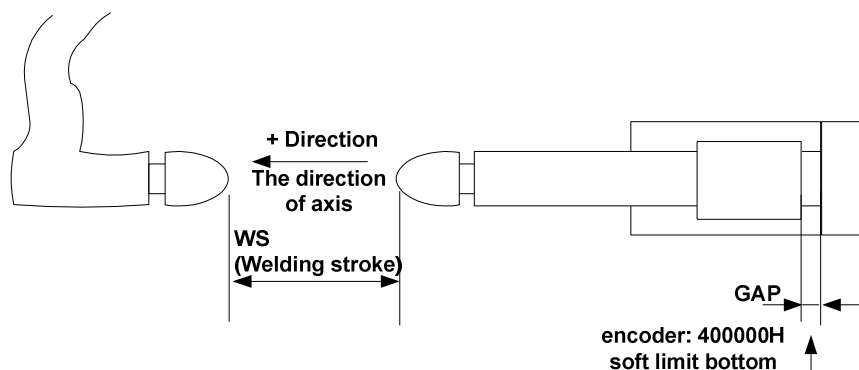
Welding Stroke & Axis Constant Setting
